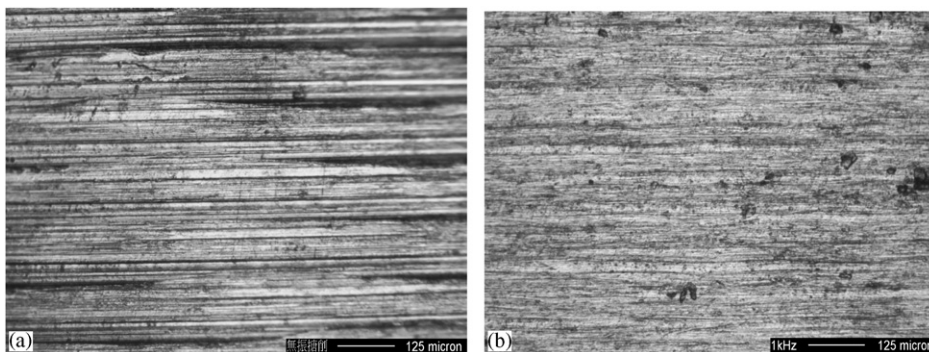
Photos of machined surface in boring (270 rpm, 0.09 mm/rev, 0.04 mm): (a) without VC; (b) with VC of 1 kHz.
